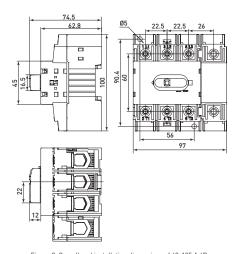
Overall and installation dimensions of 63-125 A 4P switch disconnectors
